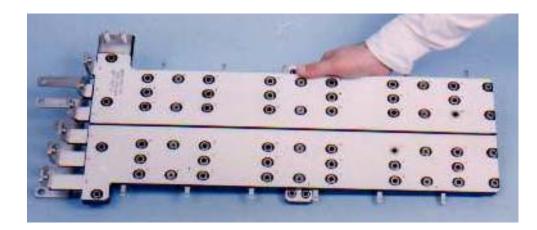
Laminated bus bar assembly (300 V, 500 A), maufactured by Eldre [30].
